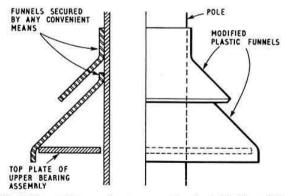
The weather proofing arrangements adopted by the writer for the upper mounting brackets.
